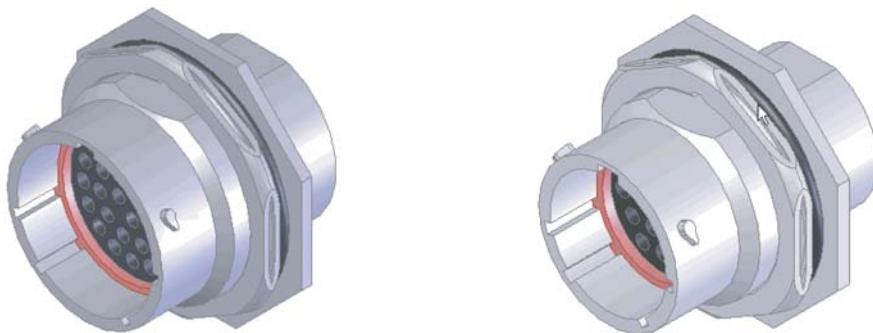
Connector for CP/CS/CBUS, Proc1 axis 6.
